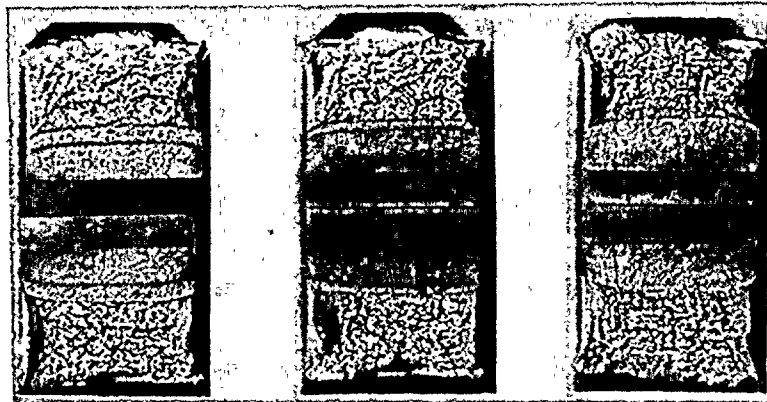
Precracked Charpy Impact Specimen Fracture Surfaces for Palo Verde Unit 1 Intermediate Shell Plate M-6701-2 (Longitudinal Orientation)
